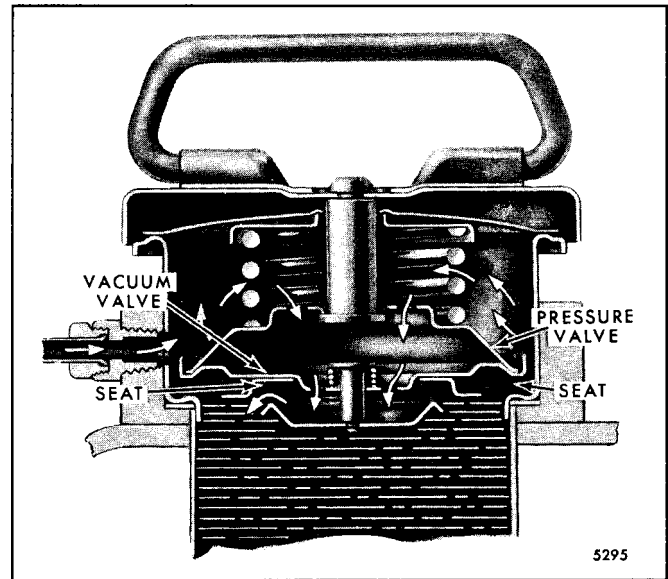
Pressure Control Cap (Vacuum Valve Open)
